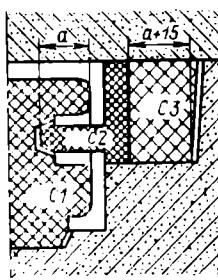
Choosing core limits to provide for easy setting of cores in a mold during its assembly
